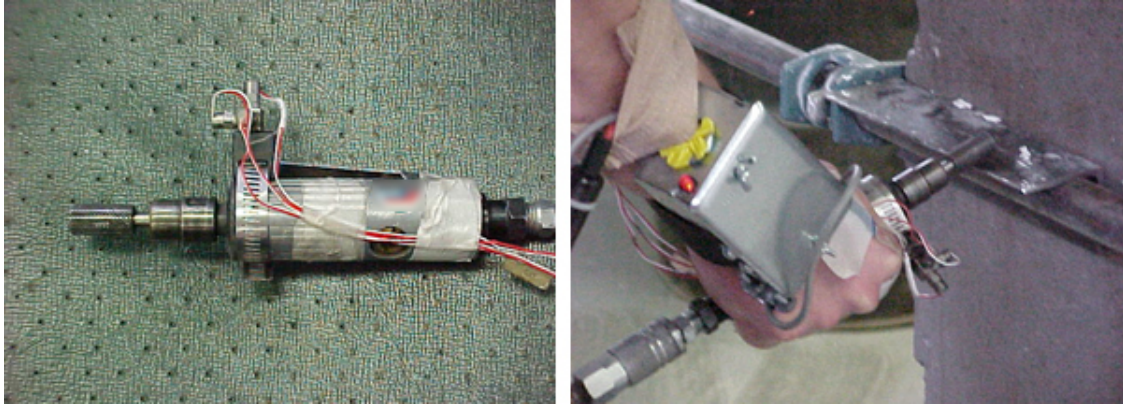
(a) Instrumented Pneumatic Grinder and (b) Grinder In Use
